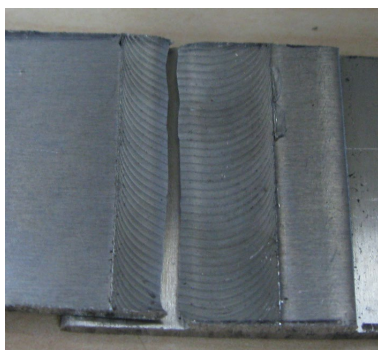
Lap shear fracture zone within FSW aluminium alloy weld nugget
